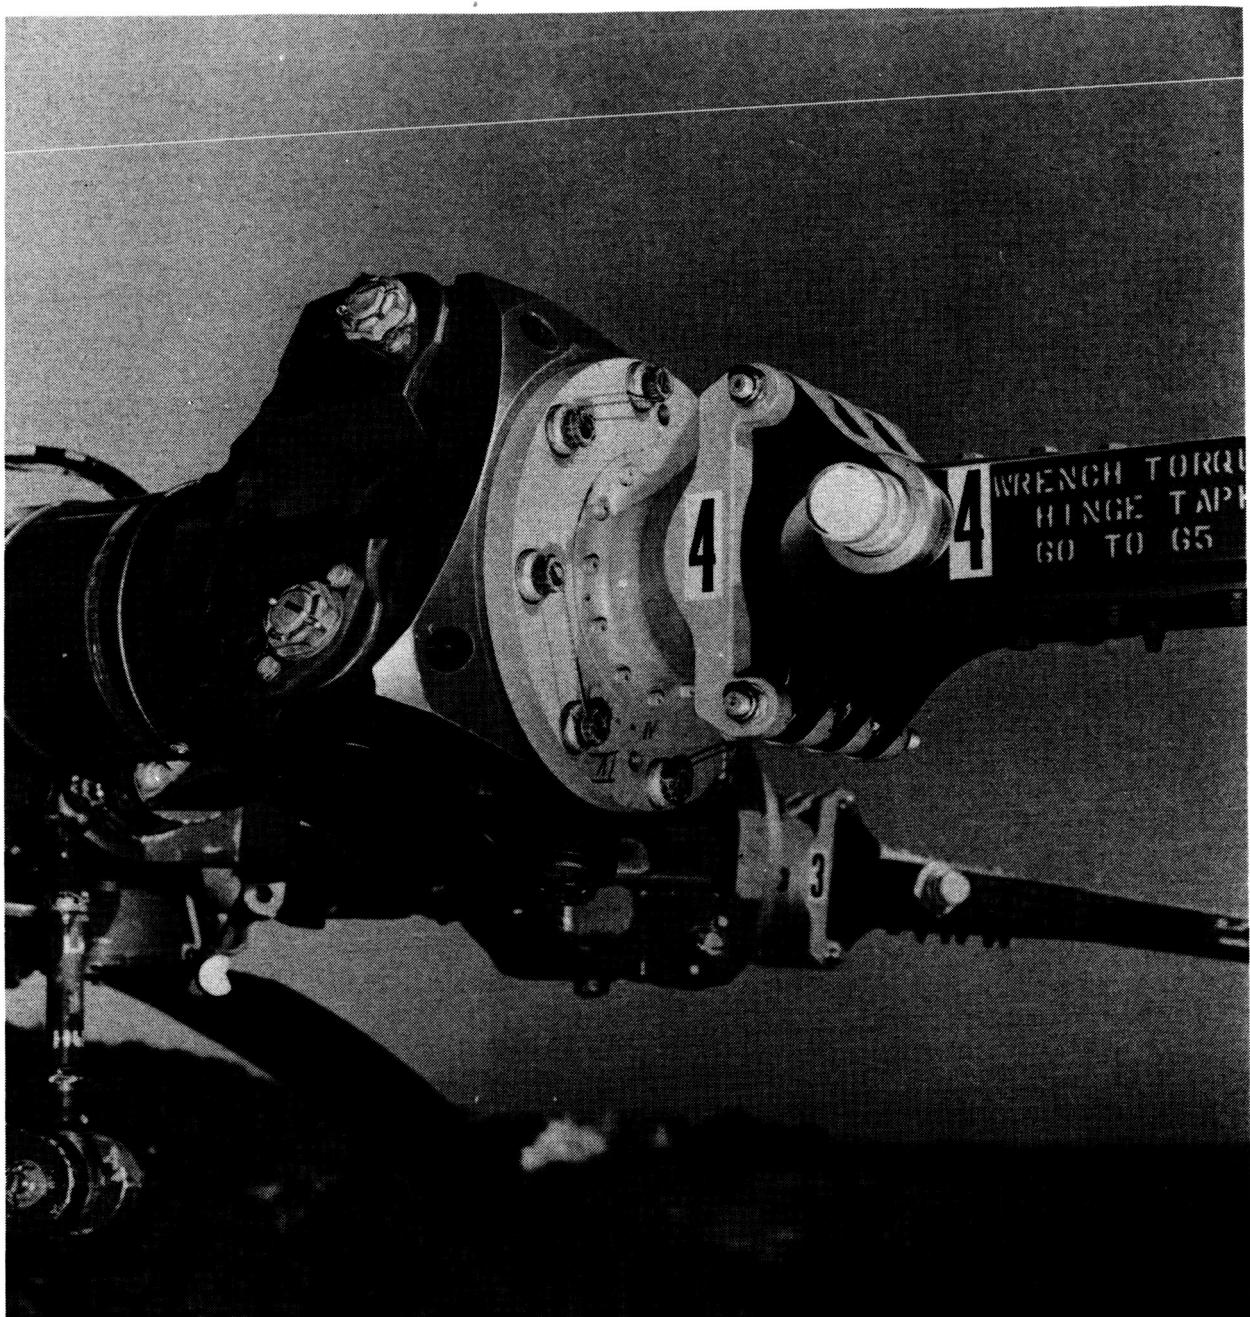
BLADE-ROTOR HEAD ADAPTERS FOR TEST
